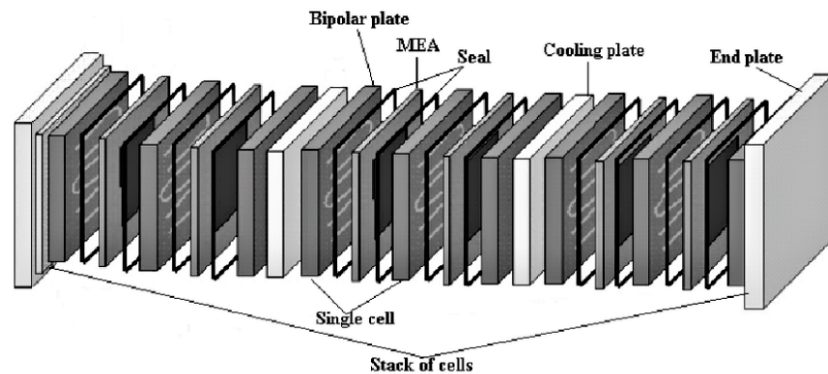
Schematic assembly of a fuel cell stack [17]
